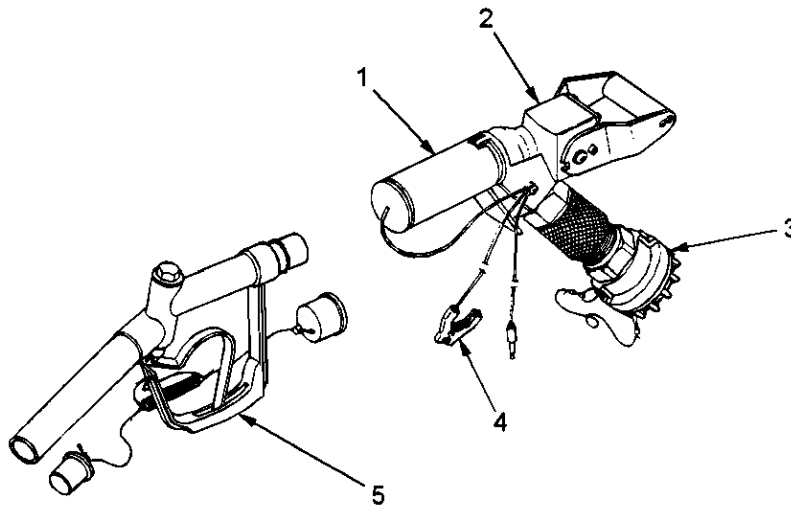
CCR Nozzle Assembly and Gravity Fill Adapter
